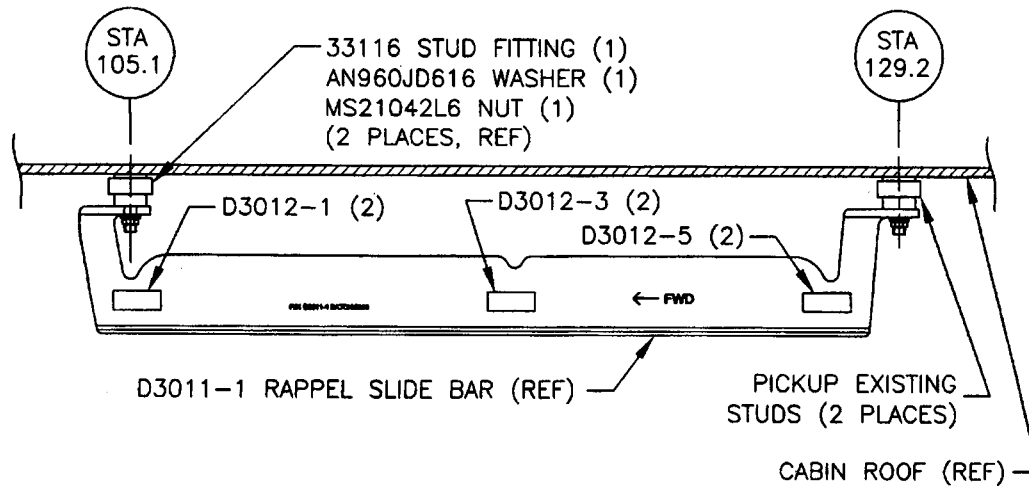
Installation of D205-523-043 Slide Bar Assembly
